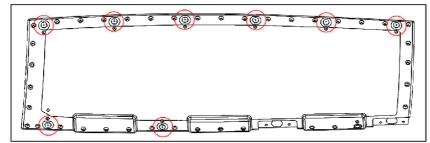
Screw Locations on Pod Assembly Cover (LH shown, RH opposite)
